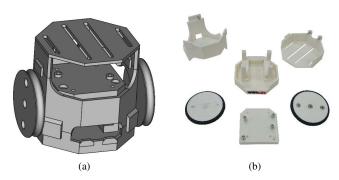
HeRo platform parts: (a) 3D Model developed in FreeCAD and (b) 3D printed parts.
